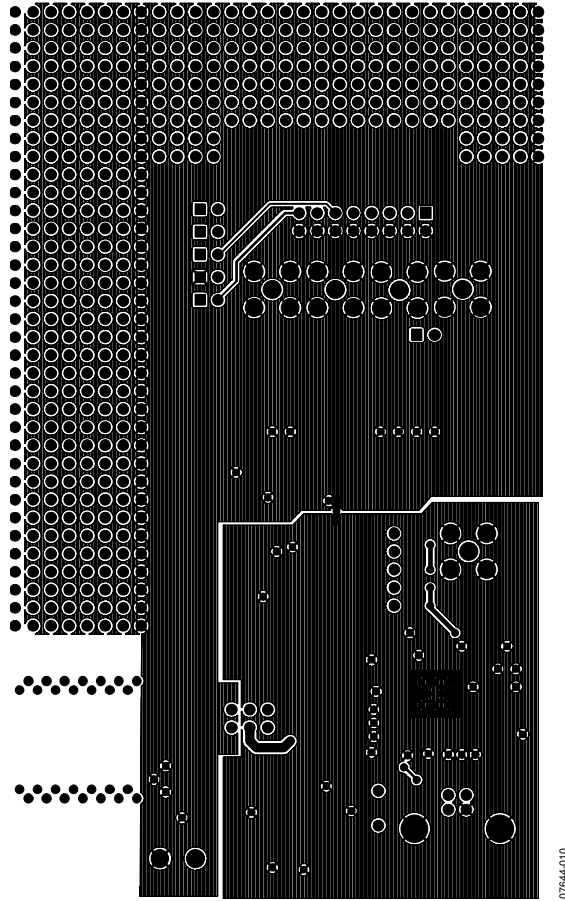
AD7785 Evaluation Board—Component Layout Diagram
